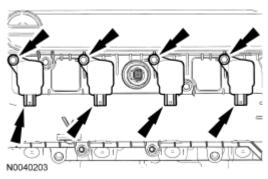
Locating Fuel Rail And Injector Assembly Bolts Courtesy of FORD MOTOR CO.
